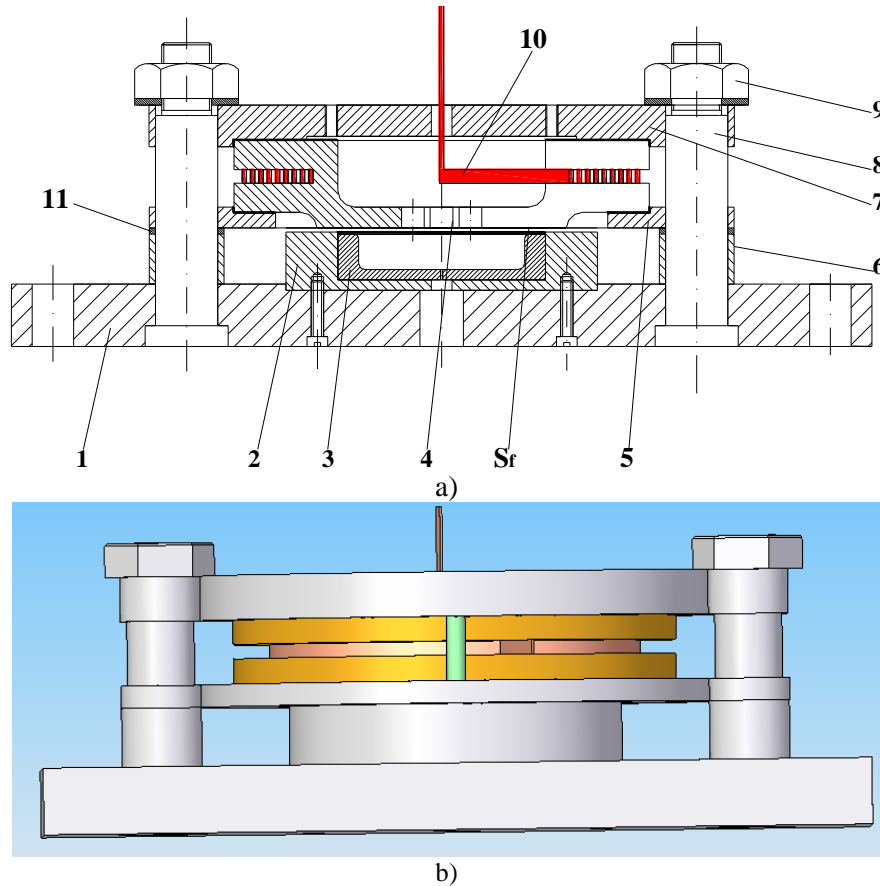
a) Drawing of the working mould with induction coil and concentrator for flat blank deforming; b) 3D view of the work mould; 1 - base plate; 2 - support plate; 3 - active plate; 4 - field concentrator; 5 - supporting plate; 6 - bush; 7 - top plate; 8 - guide column; 9 - nut; 10 - inductor; 11 - surplus
